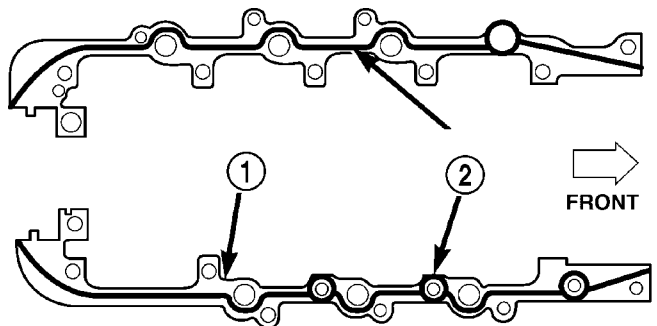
Cylinder Block-to-Bedplate Sealant Bead Location
